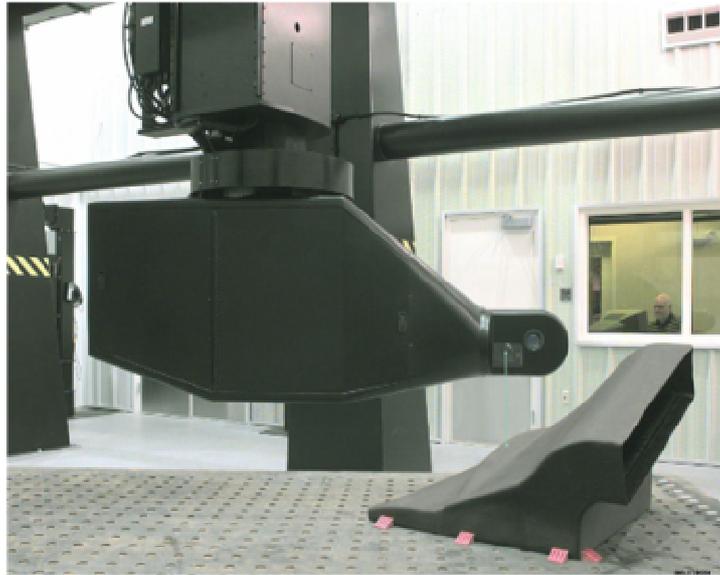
Beta LaserUT System Inspecting F22 Duct Section
